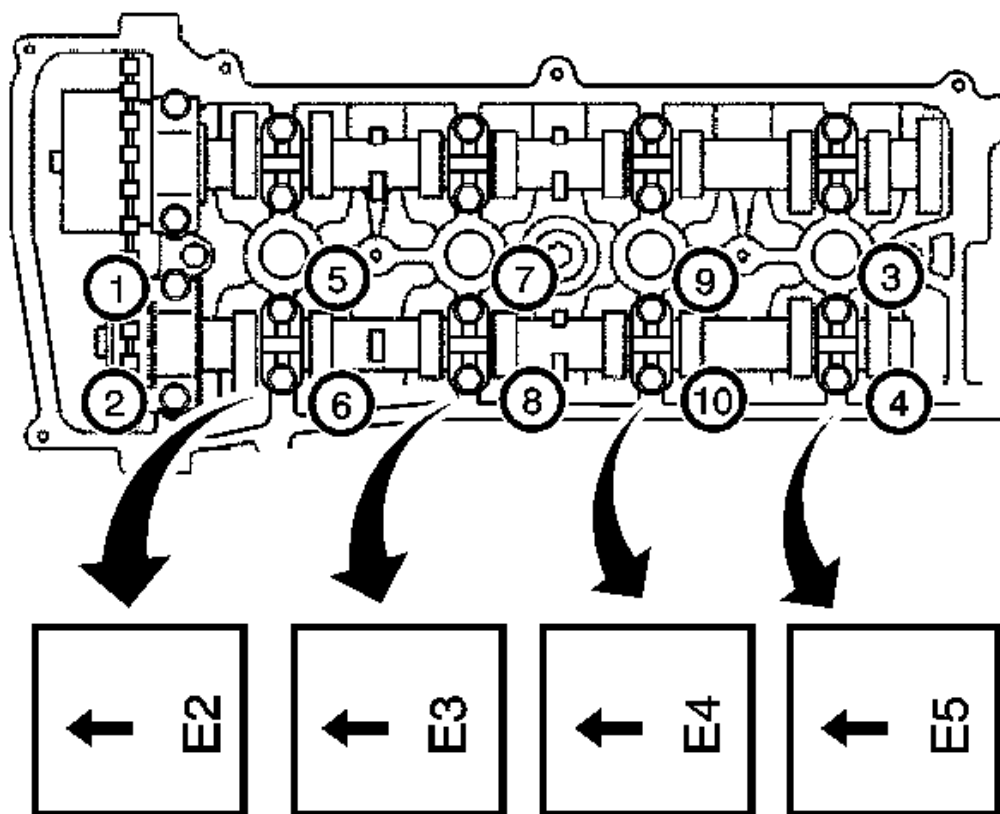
Identifying Bearing Cap Bolt Removal Sequence
